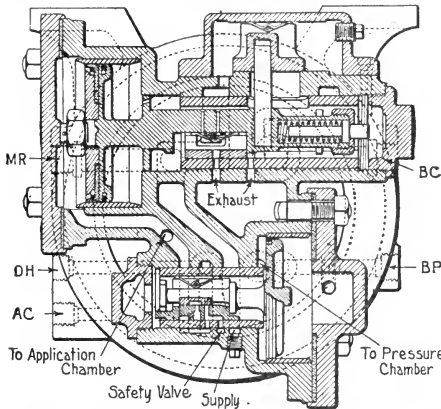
Section through Distributing Valve of "ET" Equipment.
